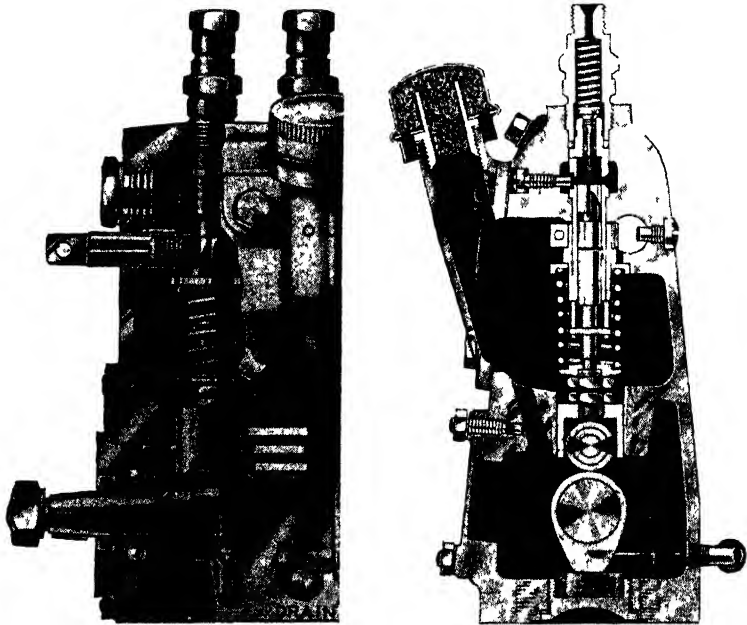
(Left).—SECTIONED SIDE VIEW OF AMERICAN BOSCH PUMP.
